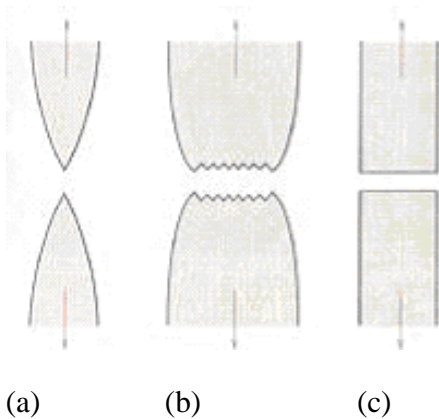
Three examples of fracture, showing: (a) a highly ductile fracture in which the specimen necks down to a point, (b) a moderate ductile fracture after some necking and (c) a brittle fracture without any plastic deformation²⁸.
